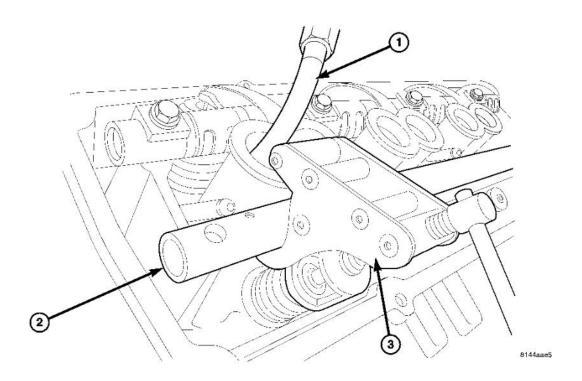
Valve Spring Tool Adapter Courtesy of CHRYSLER LLC
